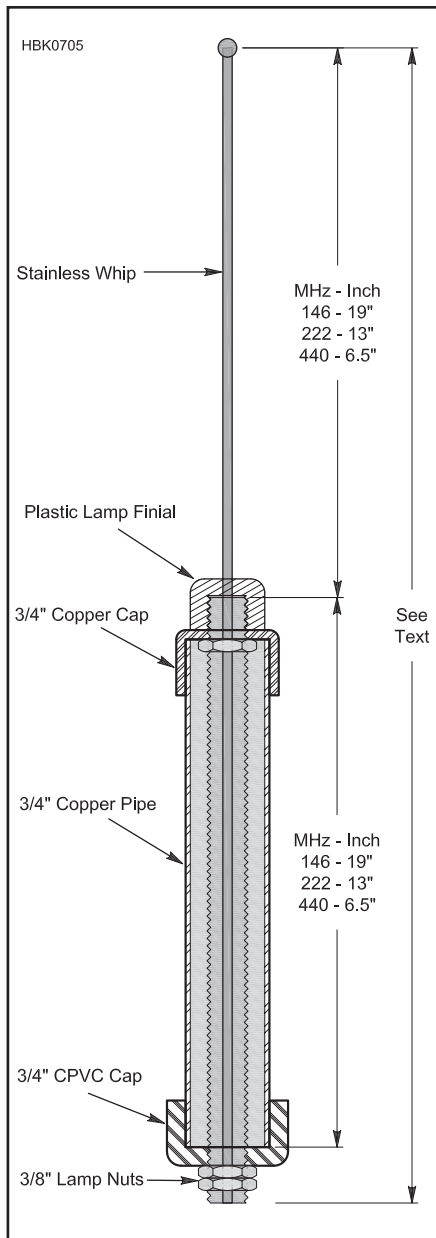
Dimensioned drawing of coaxial dipole for three bands.
